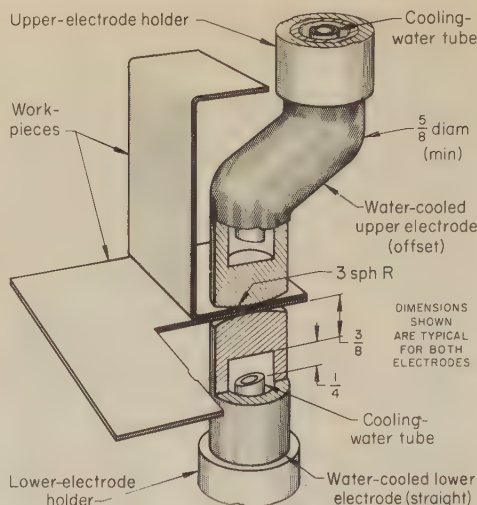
Details of construction of straight and offset radius-face electrodes used in resistance spot welding of aluminum alloys
